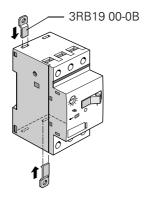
Screw-on mounting of the 3RV1 (example: frame size S00)
